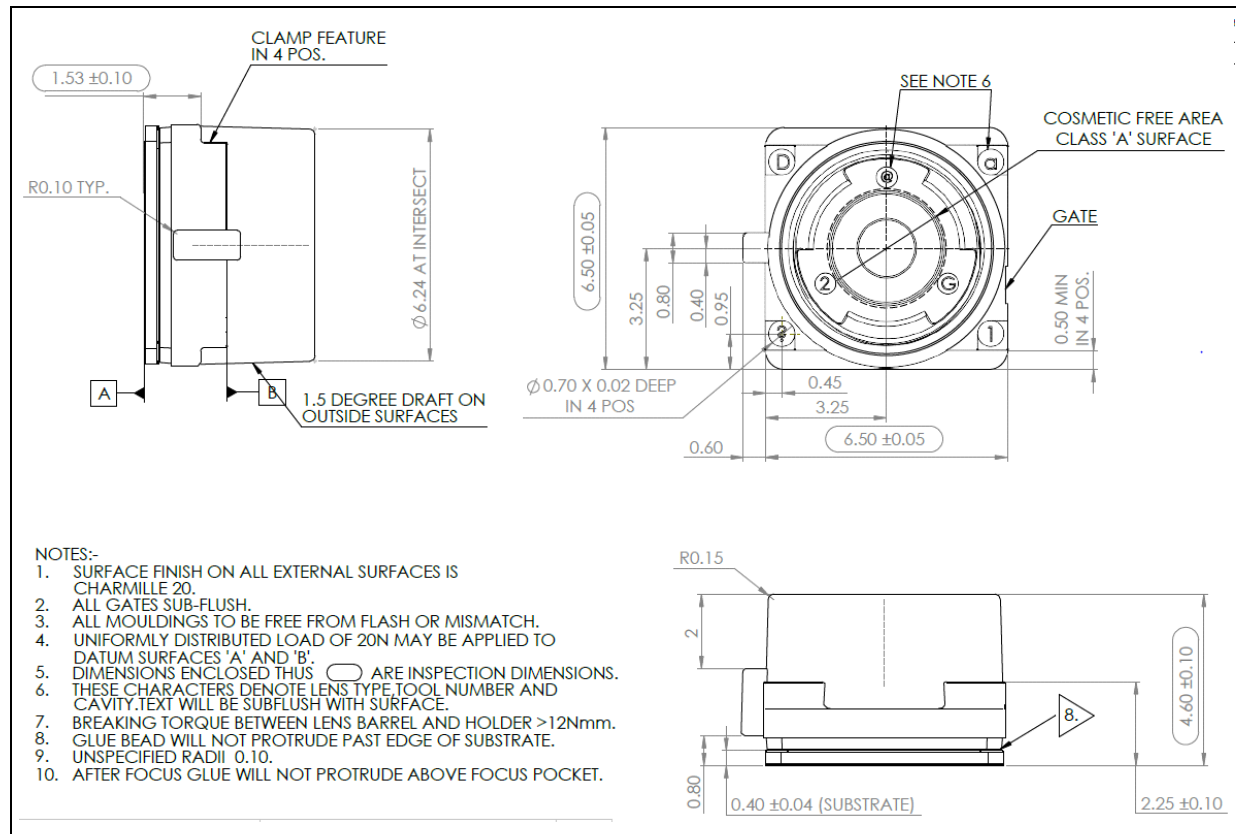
VS6955CA outline drawing - 2 of 3 - All dimensions in mm
